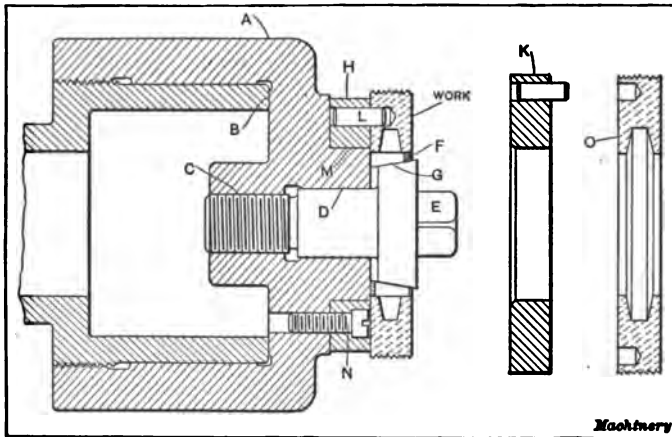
Arbor having Taper Plug which expands Split Bushing
